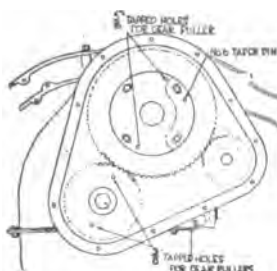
Diagram showing location of tapped holes in camshaft and crankshaft gear
